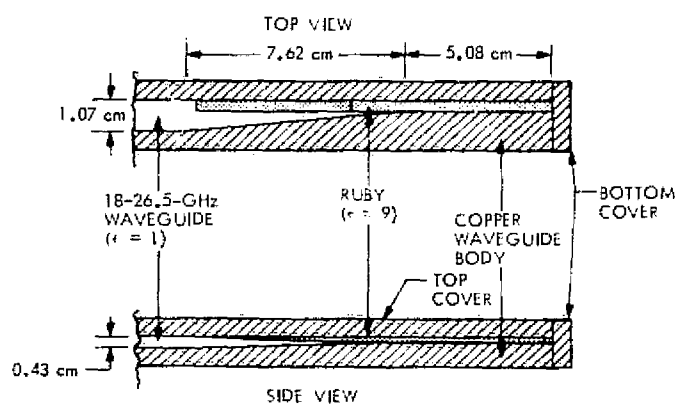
Cutaway drawing of ruby-filled waveguide and matching section
